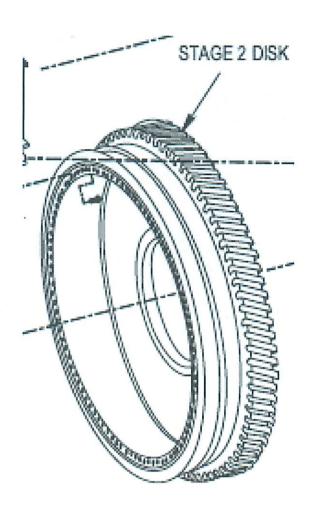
Technical Drawing of 2nd Stage Fan Disk (Tab Z-4)
